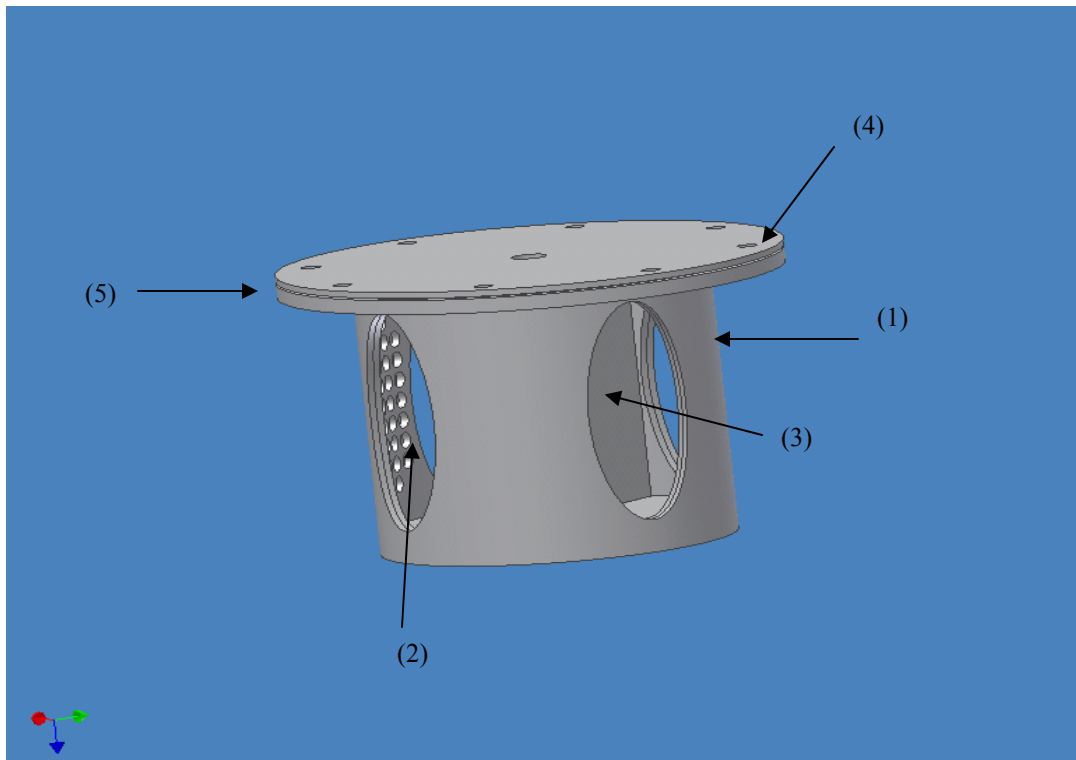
Four-Way Single Diversion Valve – (1)Outer cylinder; (2) Inner cylinder; (3) Partition Plate; (4) Top cap; (5) Top flange
